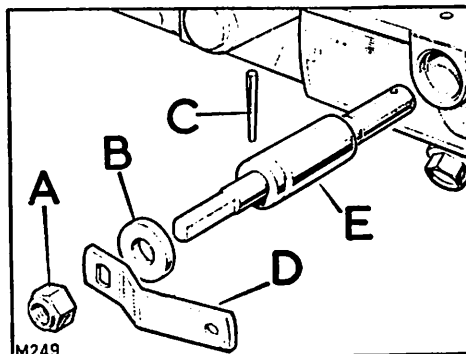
Shaft and oil seal for manual valve lever control shaft
